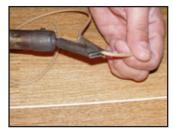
3.5 mm welding thread in 4.0 mm tip
